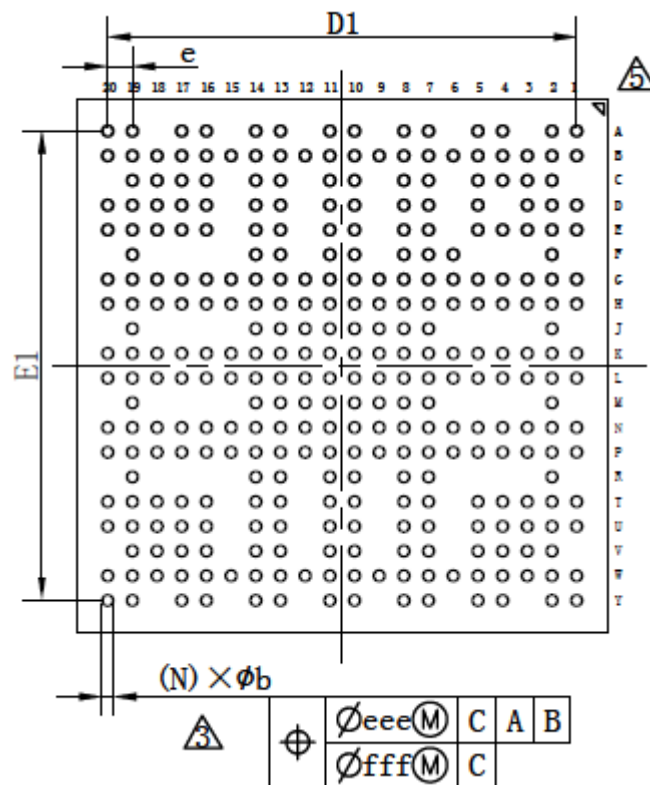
RK3128 TFBGA316 Package Bottom View
